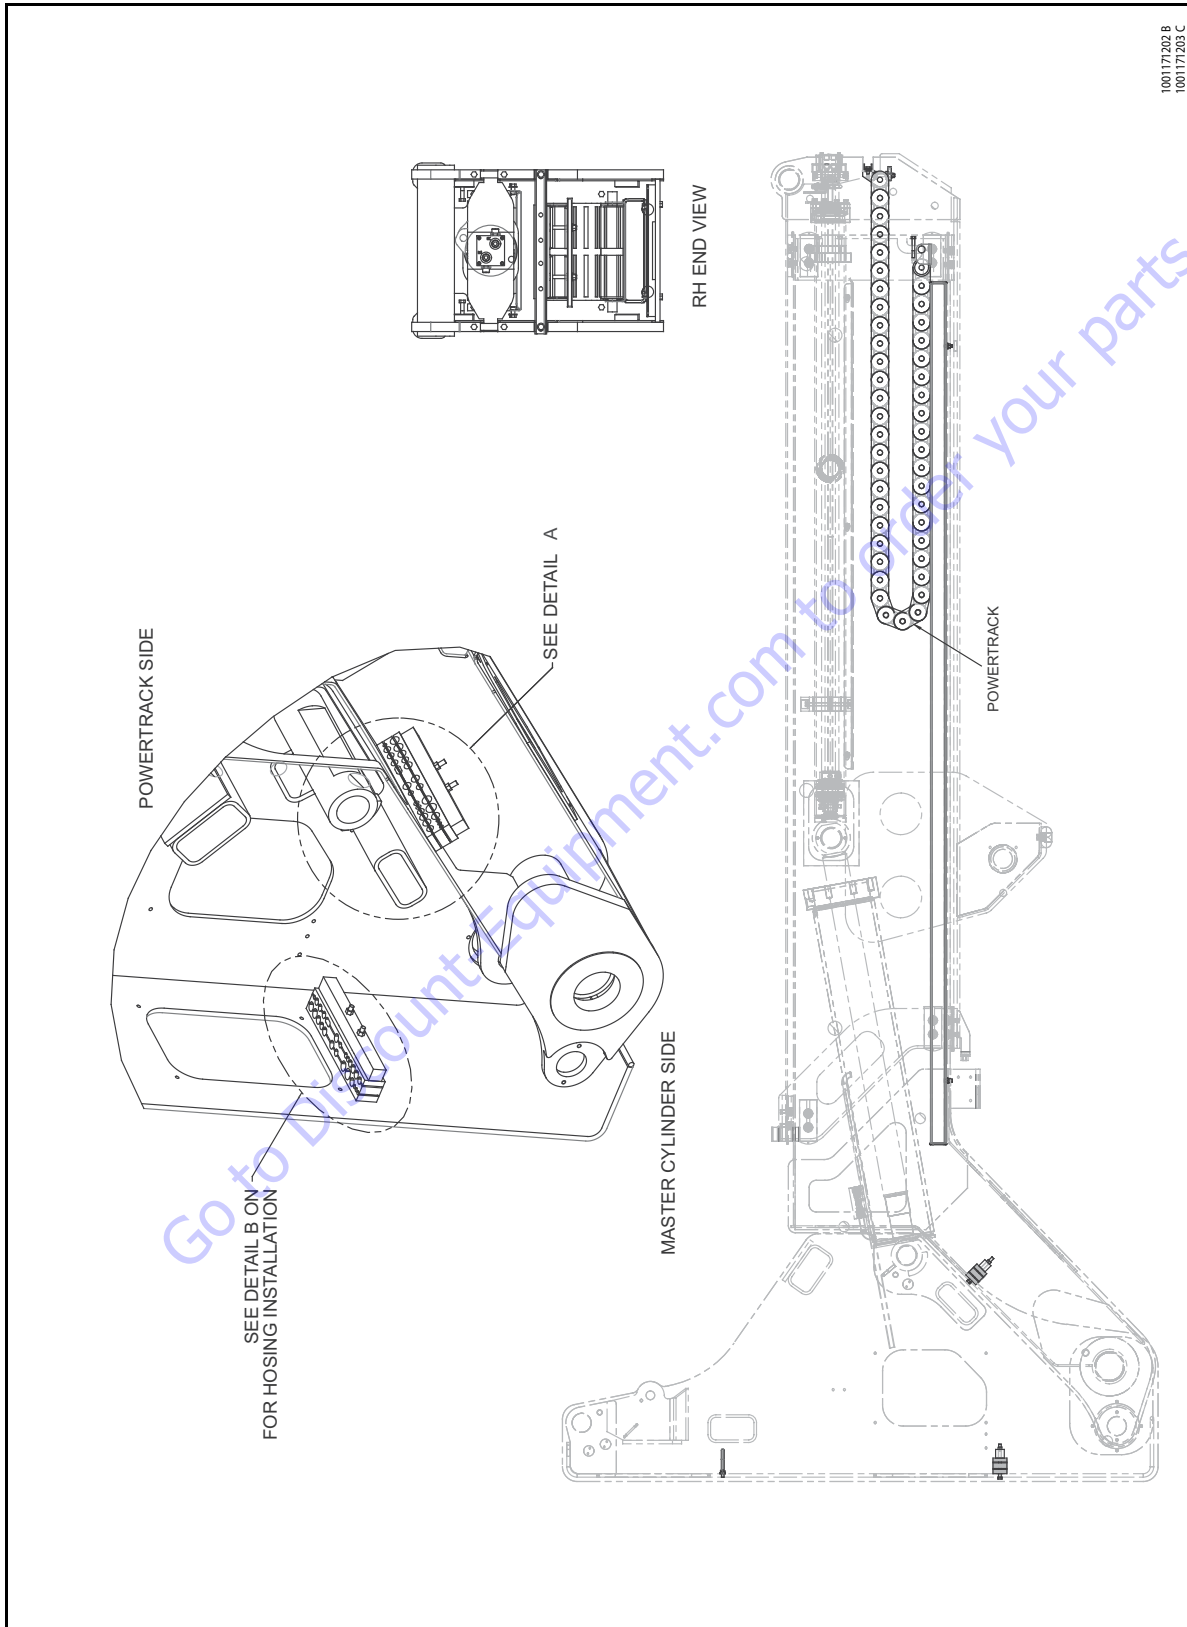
Powertrack Installation Tower Boom (Sheet 1 of 3)
